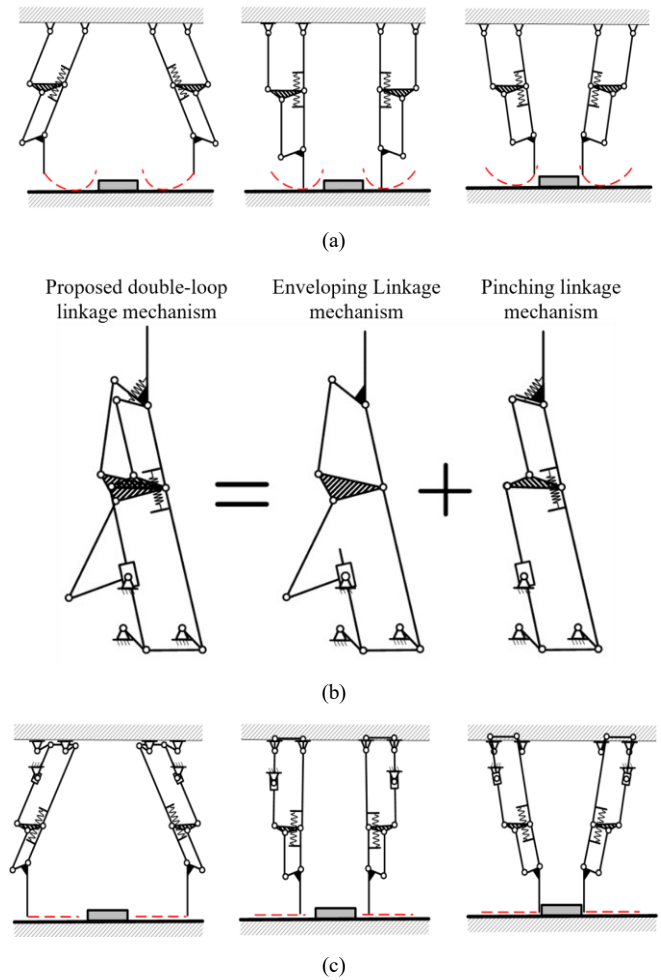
Diagram of manipulator. (a) Traditional pinching, (b) proposed pinching, (c) composed multiple-linkage mechanism.
